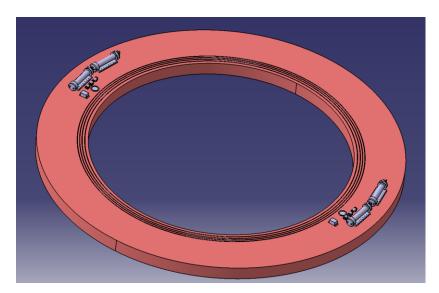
2-stage Cryocooler Mount CAD Assembly
